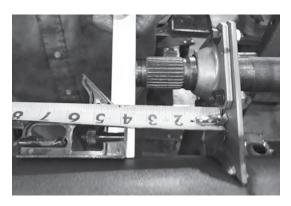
S-cam bracket assembly must be 3.5 inches (90 mm) from the end of the camshaft
